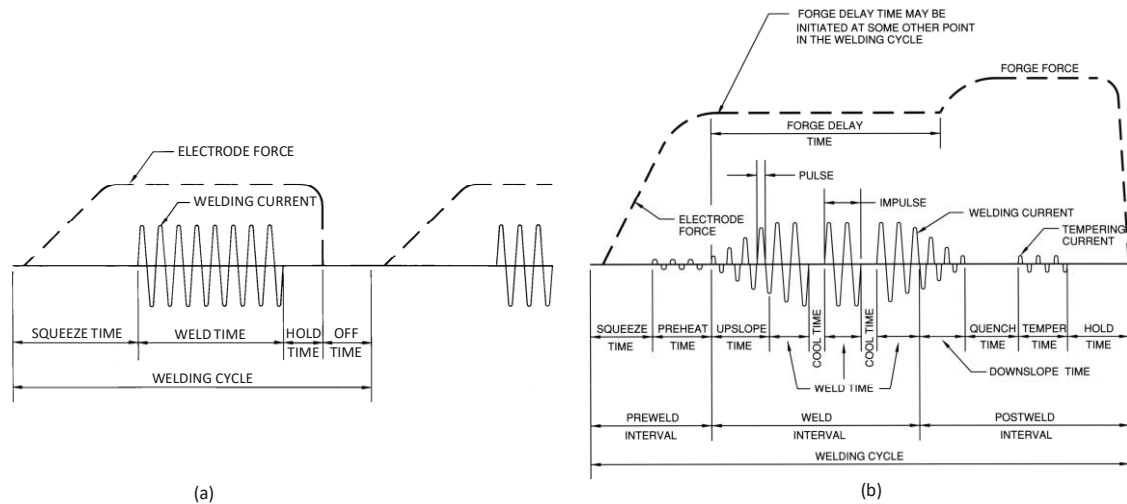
Resistance seam weld schedules: (a) Single-impulse weld schedule, & (b) Multi-impulse weld schedule with cool down periods between the weld impulse cycle [45].
